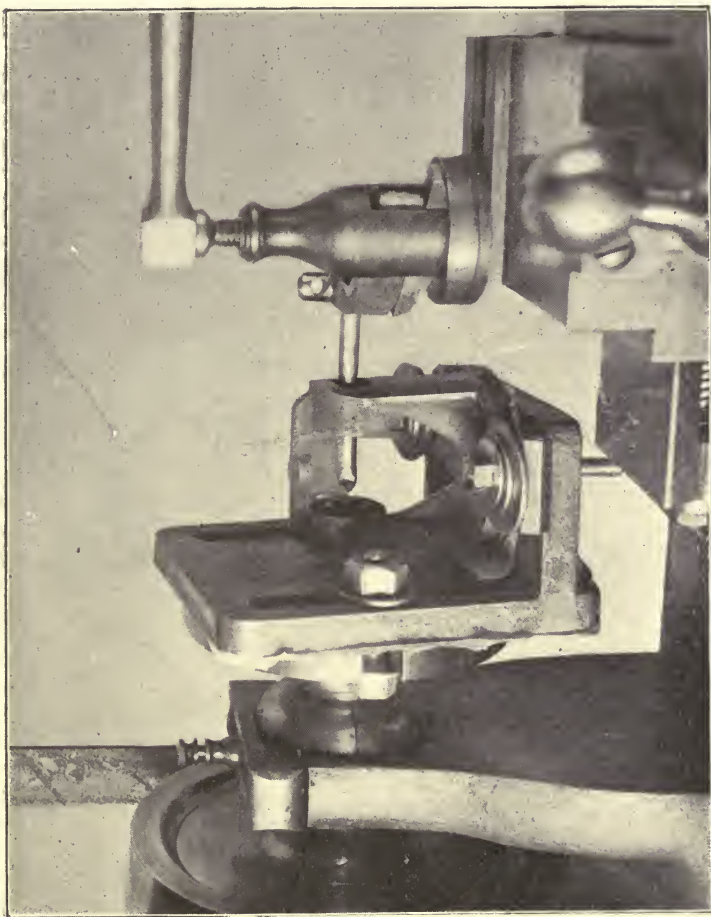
BORING HOLE IN REAR BOSS OF PISTON CASTING FOR PISTON PIN.
